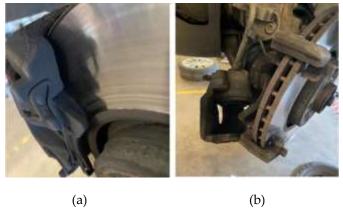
Scratches and wear traces present on the brake disk surface (a); brake disk with traces of rust (b)
